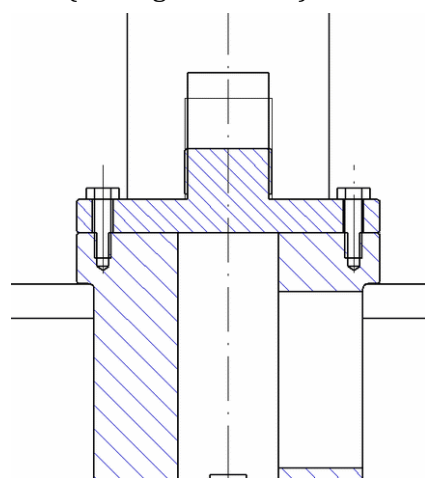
Upper piston tube with hydraulic piston flange cross section
